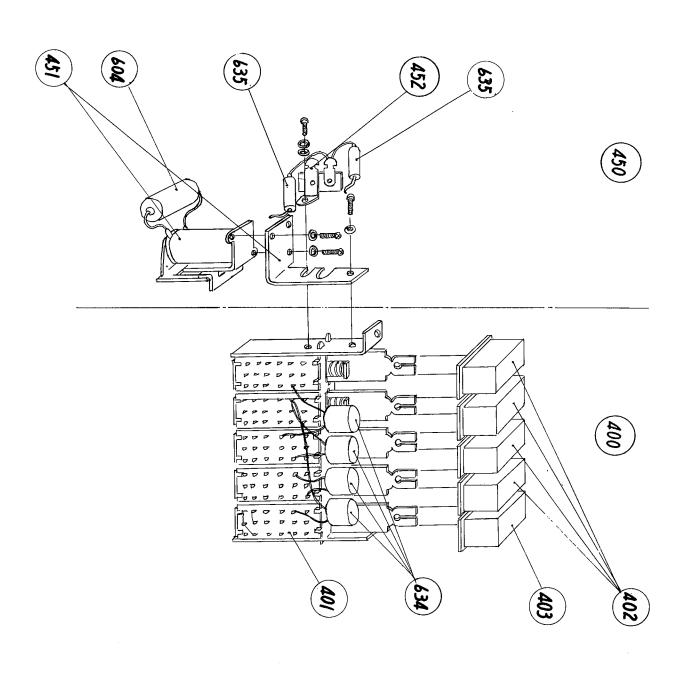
TRANSPORT SELECTOR SWITCH, SHUT-OFF SOLENOID, EXPLODED VIEW
